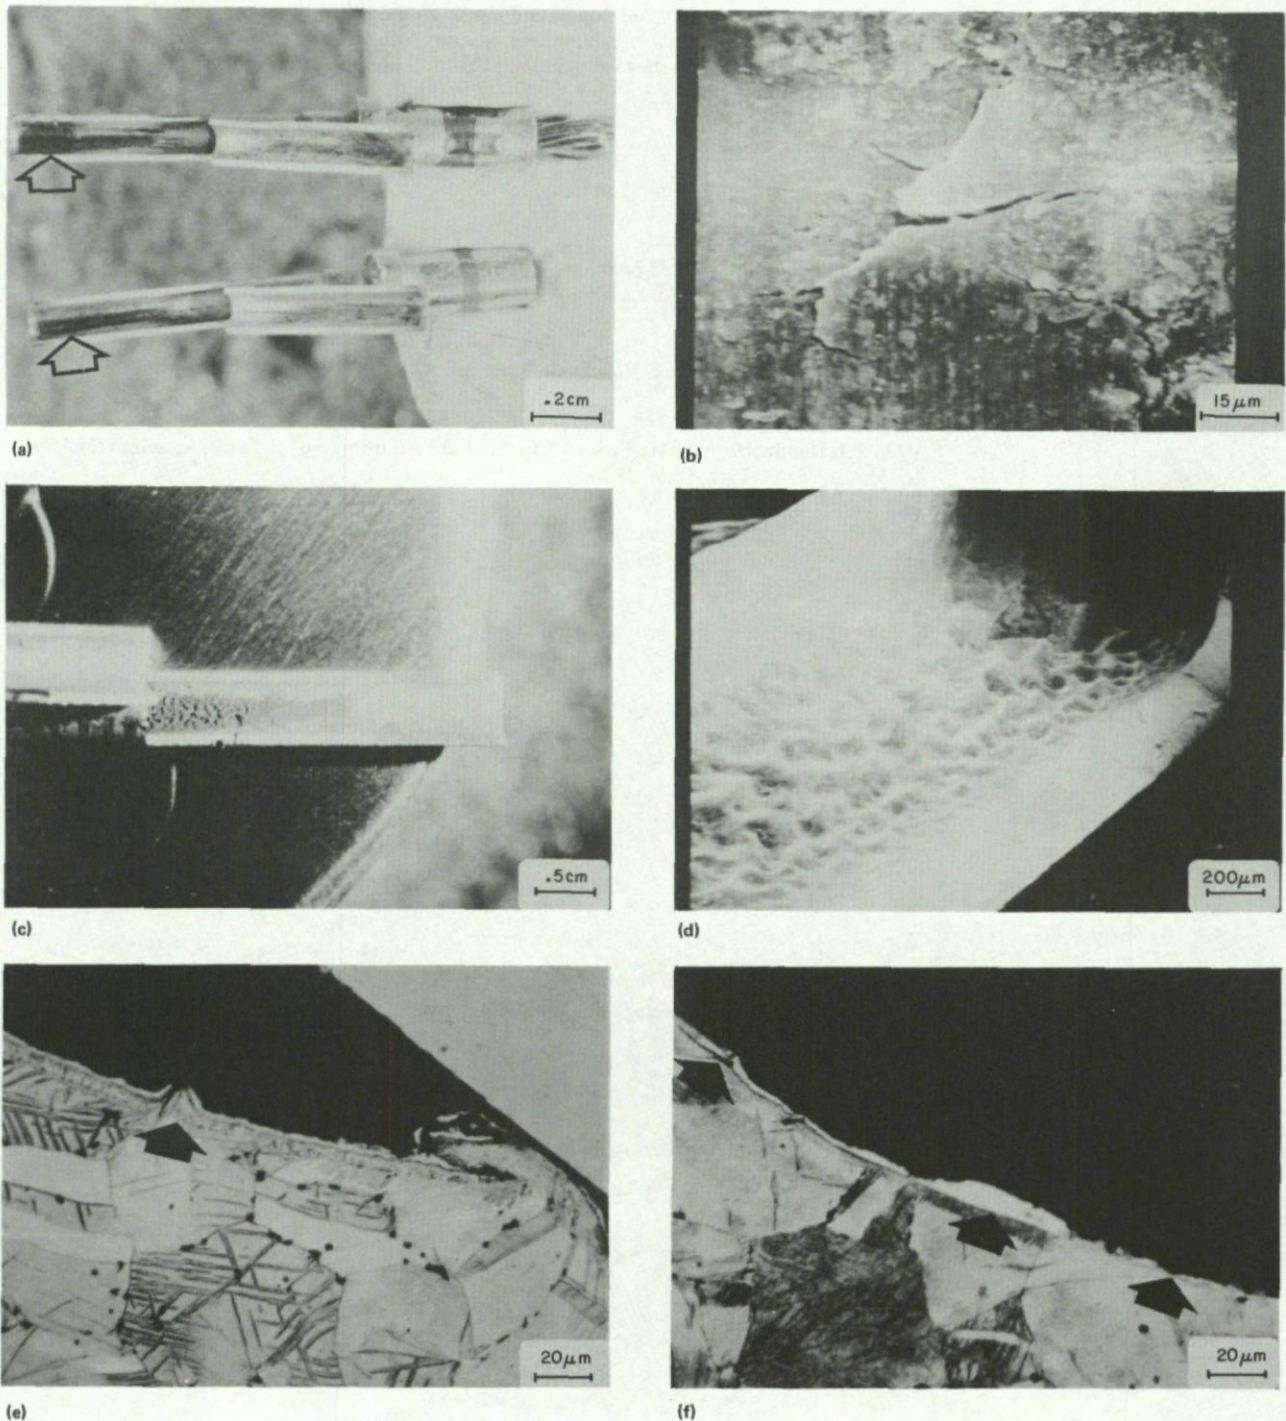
Fretting corrosion in electrical connectors
